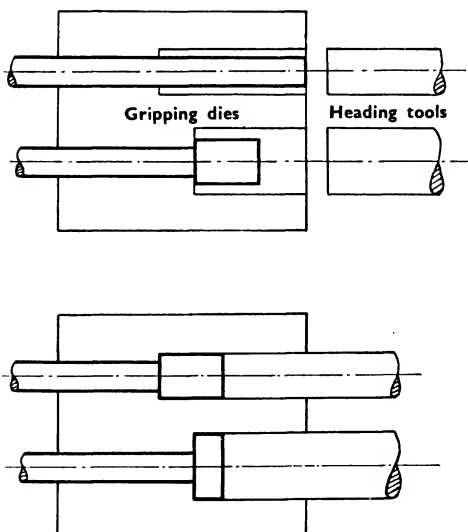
C. TWO-STAGE UPSETTING DIES USED IN A FORGING MACHINE
